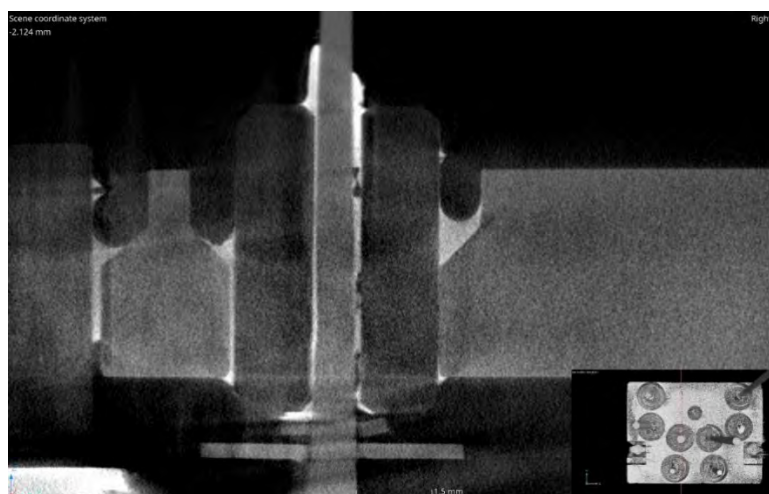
x-ray tomography inspections on the final prototypes of the Diagnostic Pressure Gauges.
